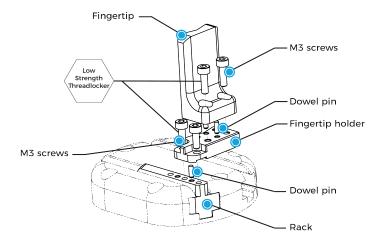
Mounting fingertips on holders, and holders on racks.
